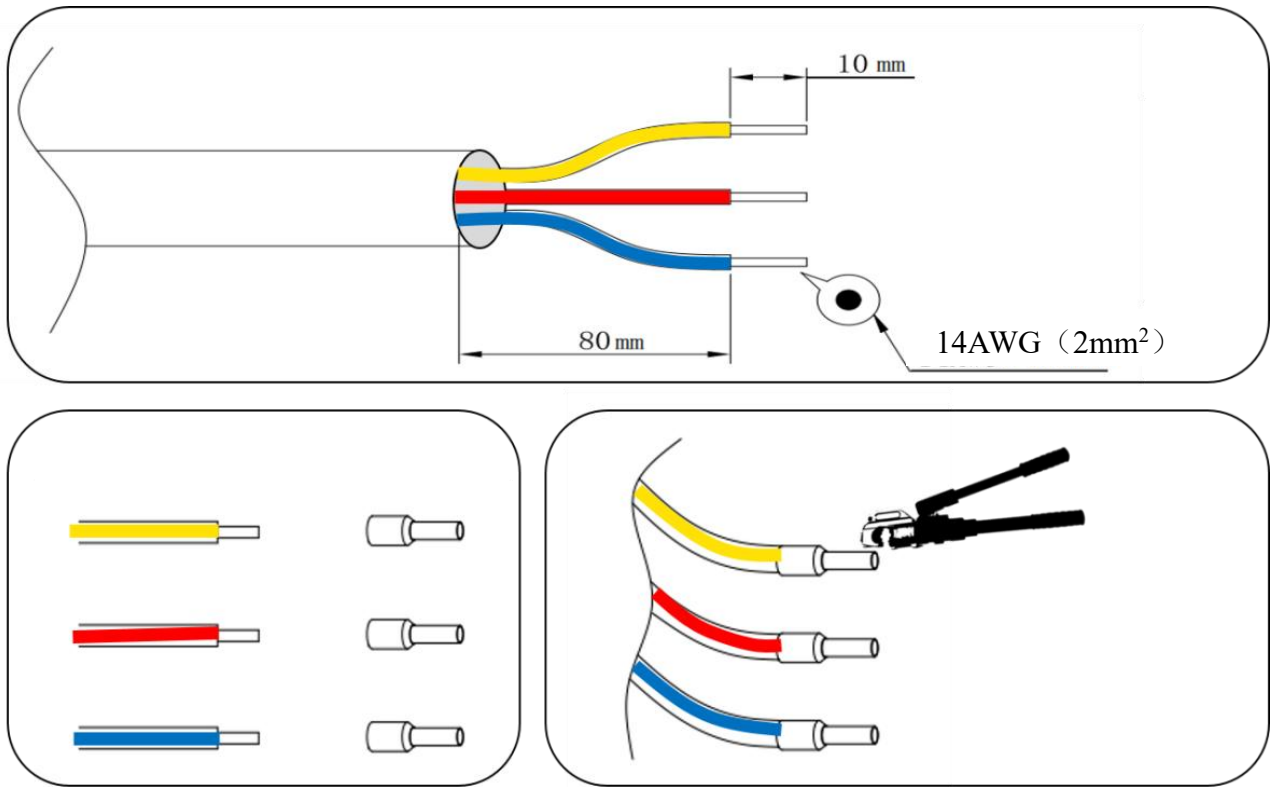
Crimping Method of Tubular Terminal
